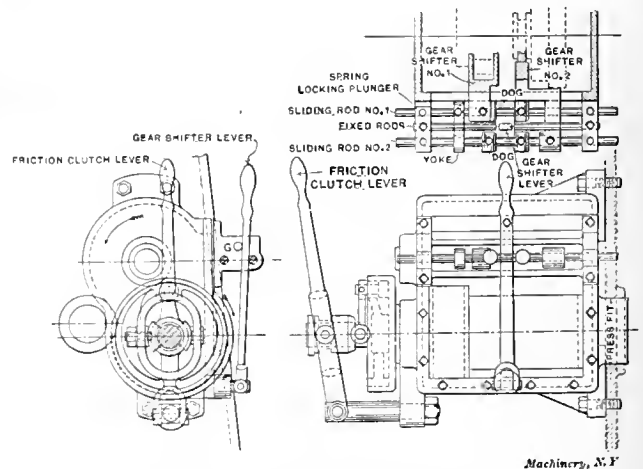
The Arrangement of the Gear Box, and the Levers by which the Drive is Controlled.
